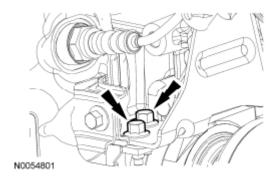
Locating RH Catalytic Converter Support Bracket Bolts Courtesy of FORD MOTOR CO.
